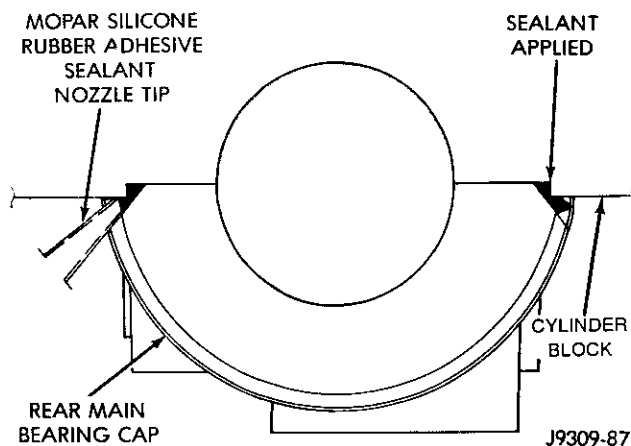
Apply Sealant to Bearing Cap to Block Joint
